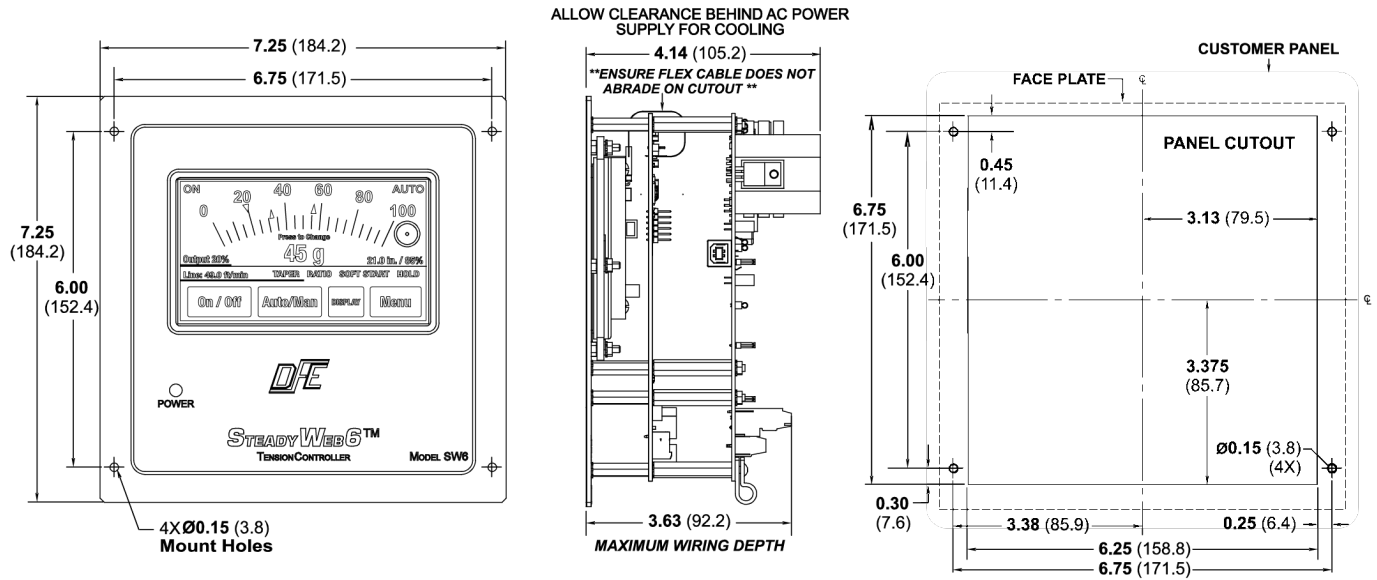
PANEL VERSION DIMENSIONS and VIEWS
